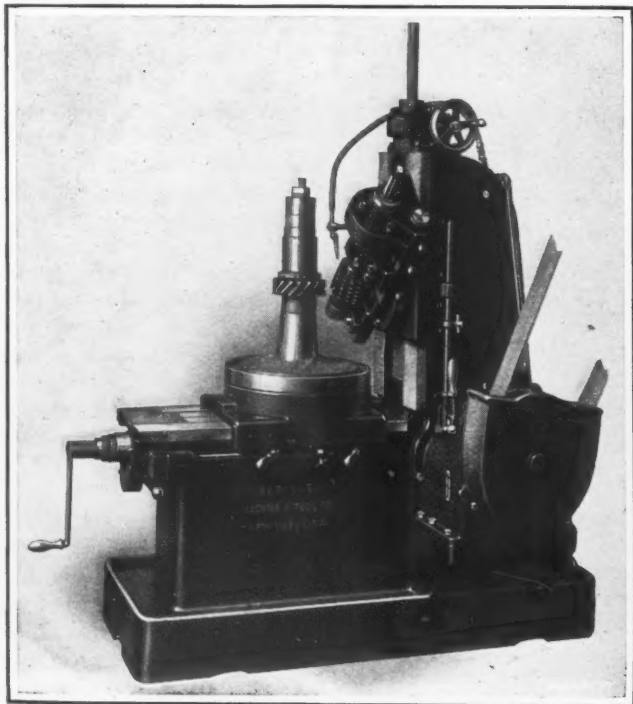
Hercules Gear-hobber provided with Differential that simplifies Spiral Gear Hobbing
